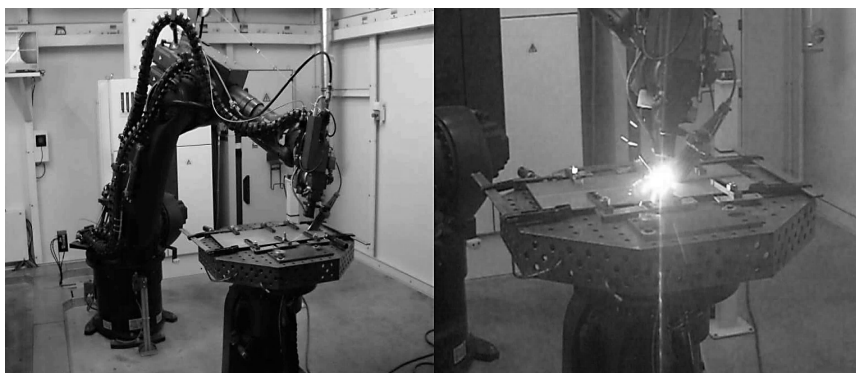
Laser welding process on Trumpf TrueLaser Robot 5020 including sheet pressing system [4]
